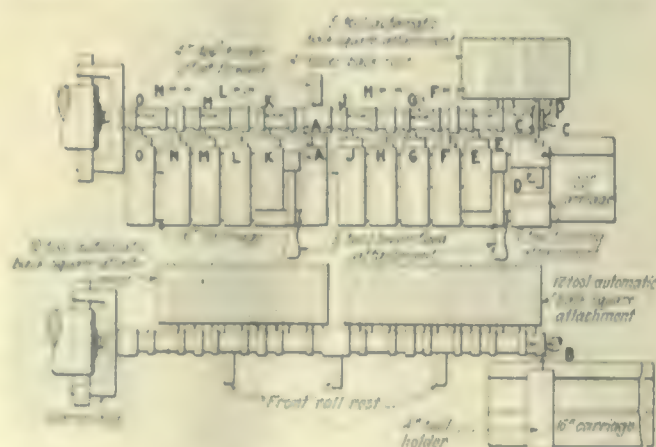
ANOTHER EXAMPLE OF LO-SWING TOOLING
